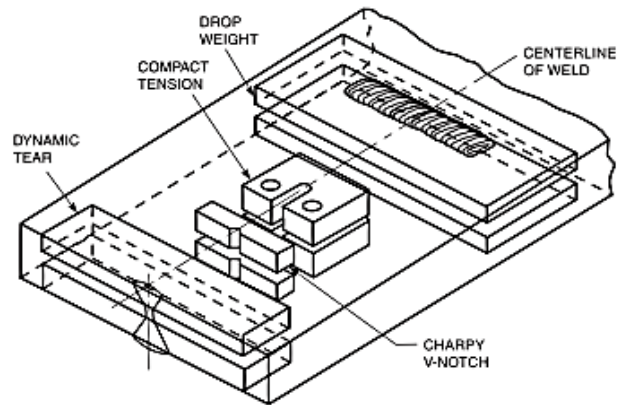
Orientation of Weld Metal Fracture Toughness Specimens in a Double-Groove Weld Thick Section Weldment
